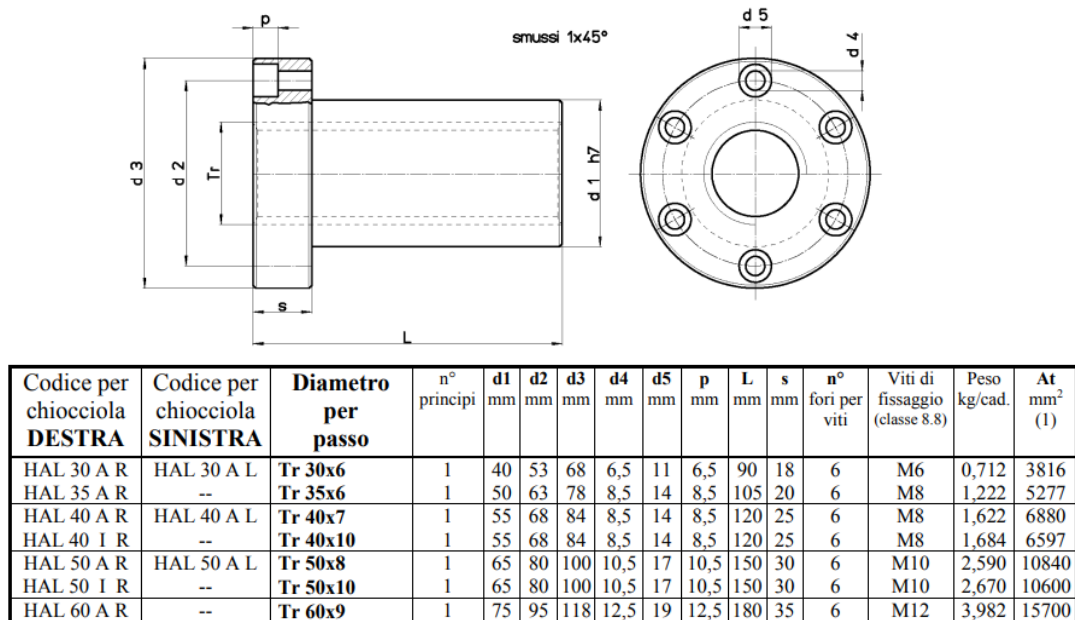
CAD drawing and general dimensions of the bronze-aluminum available nuts
